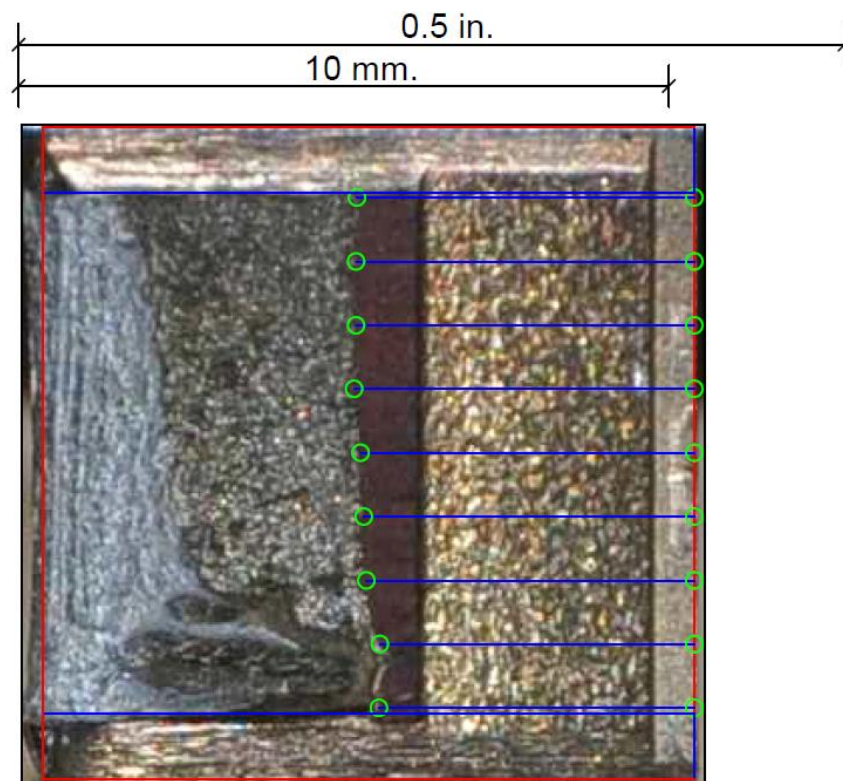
Specimen F34' Fracture Surface
